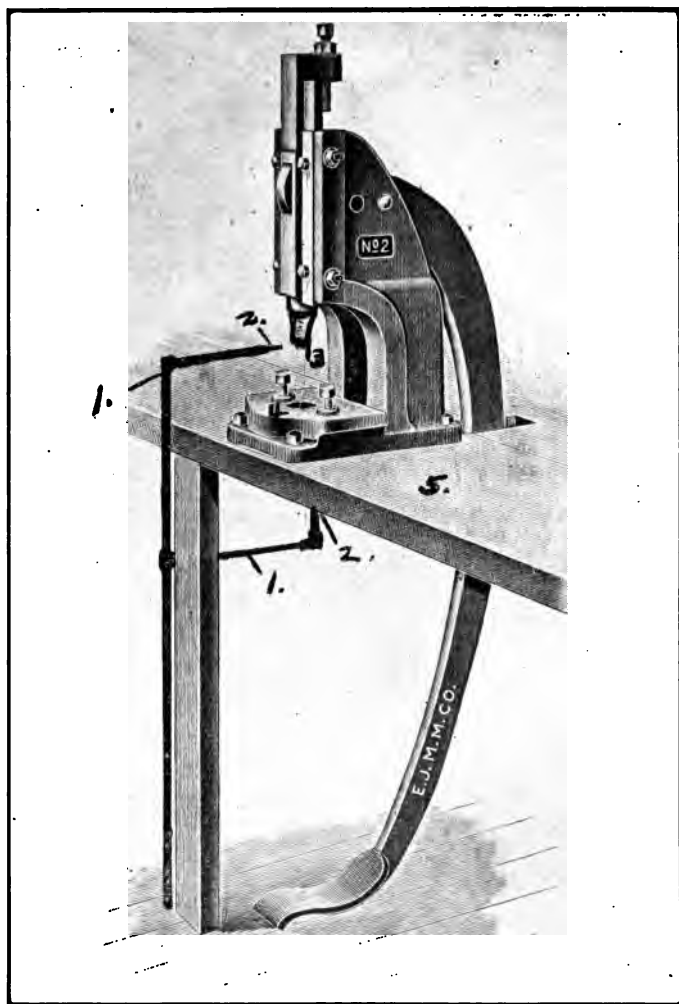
TREADLE BUTTON PRESS USED IN MAKING CELLULOID BUTTONS. DIE AND POCKET BEING GAS HEATED.
